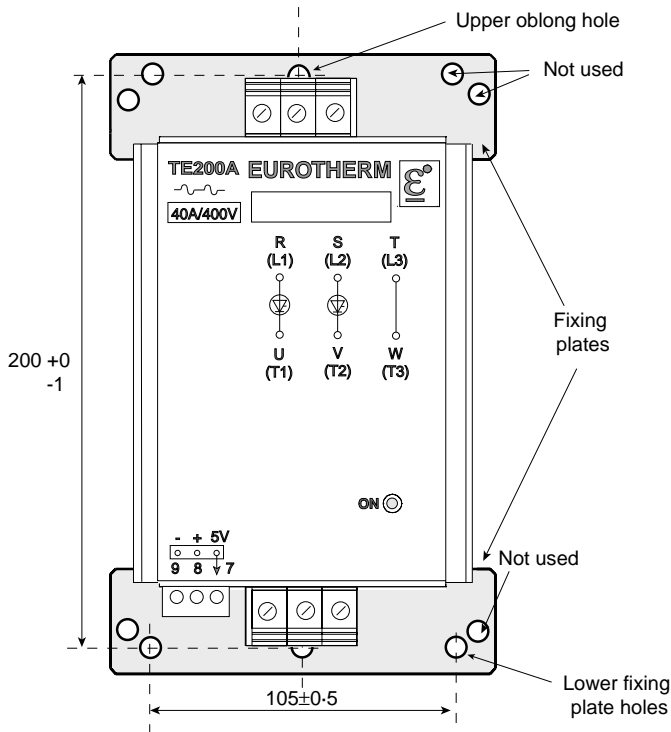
Bulkhead drilling and mounting dimensions (in mm) for the TE200A controller
